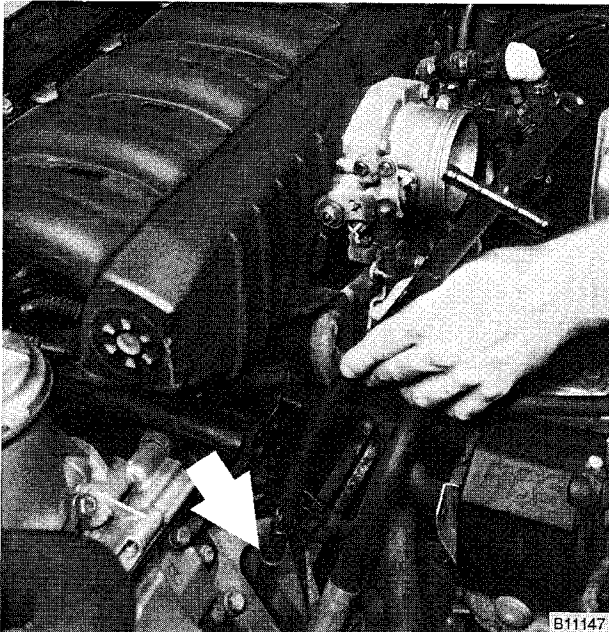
Oil dipstick guide tube being removed. Use new O-ring (arrow) during installation.
